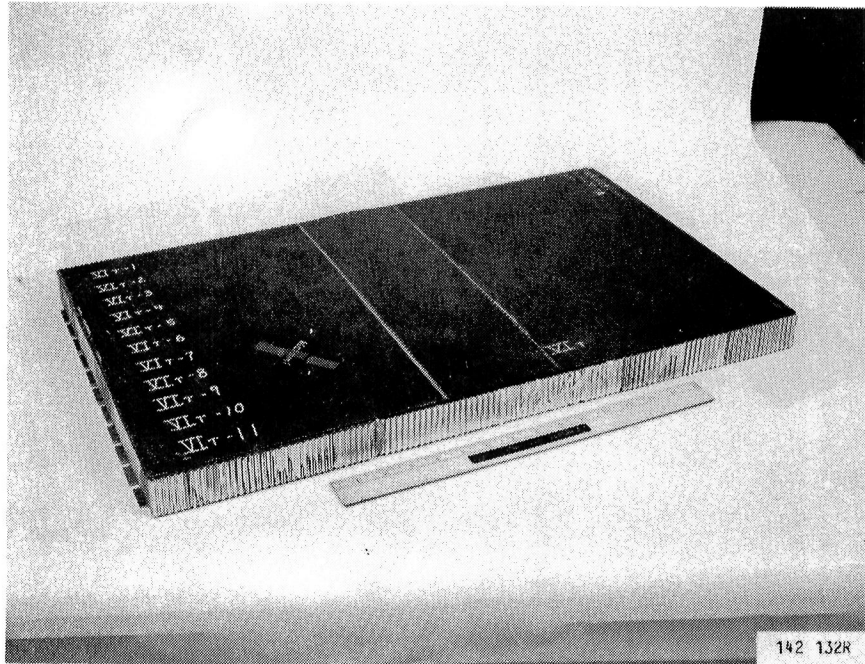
Sandwich beam specimen with slave skins (type VI-T).
